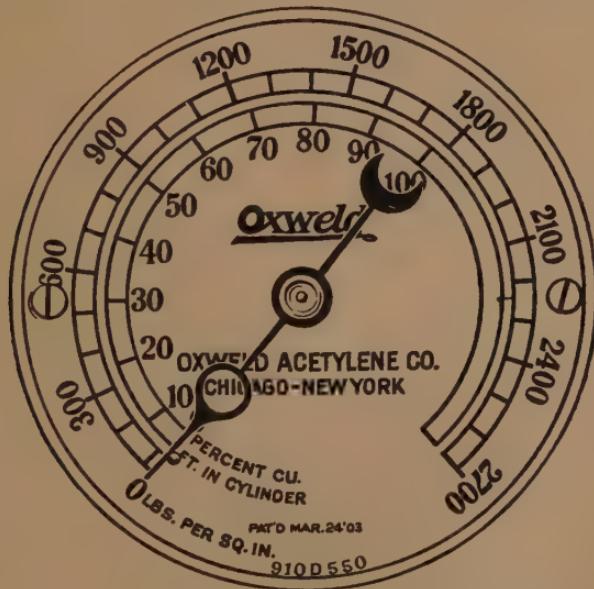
Dial of High-Pressure Gage of Oxygen Regulator
